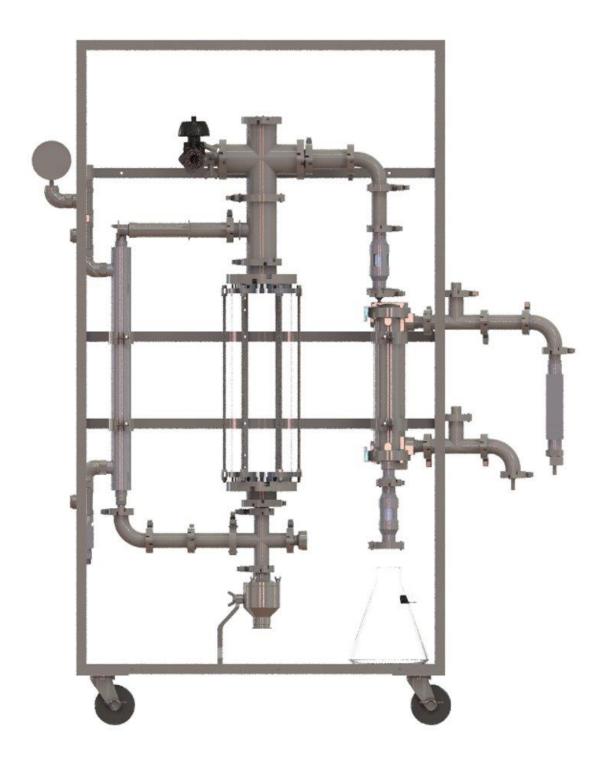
Final assembly design iteration 2 of vacuum evaporation system in SolidWorks.
